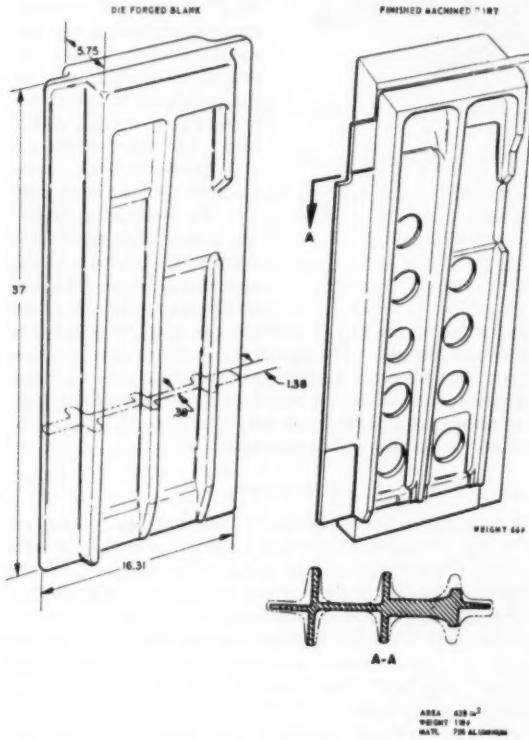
WING SPAR-TO-FUSELAGE ATTACH FITTING
